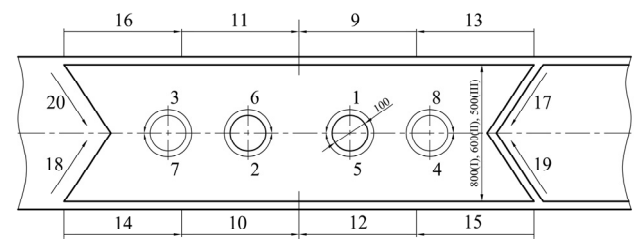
Welding plan of reinforcements in segments I, II and III (the numbers indicate the order of weld joints performing)
